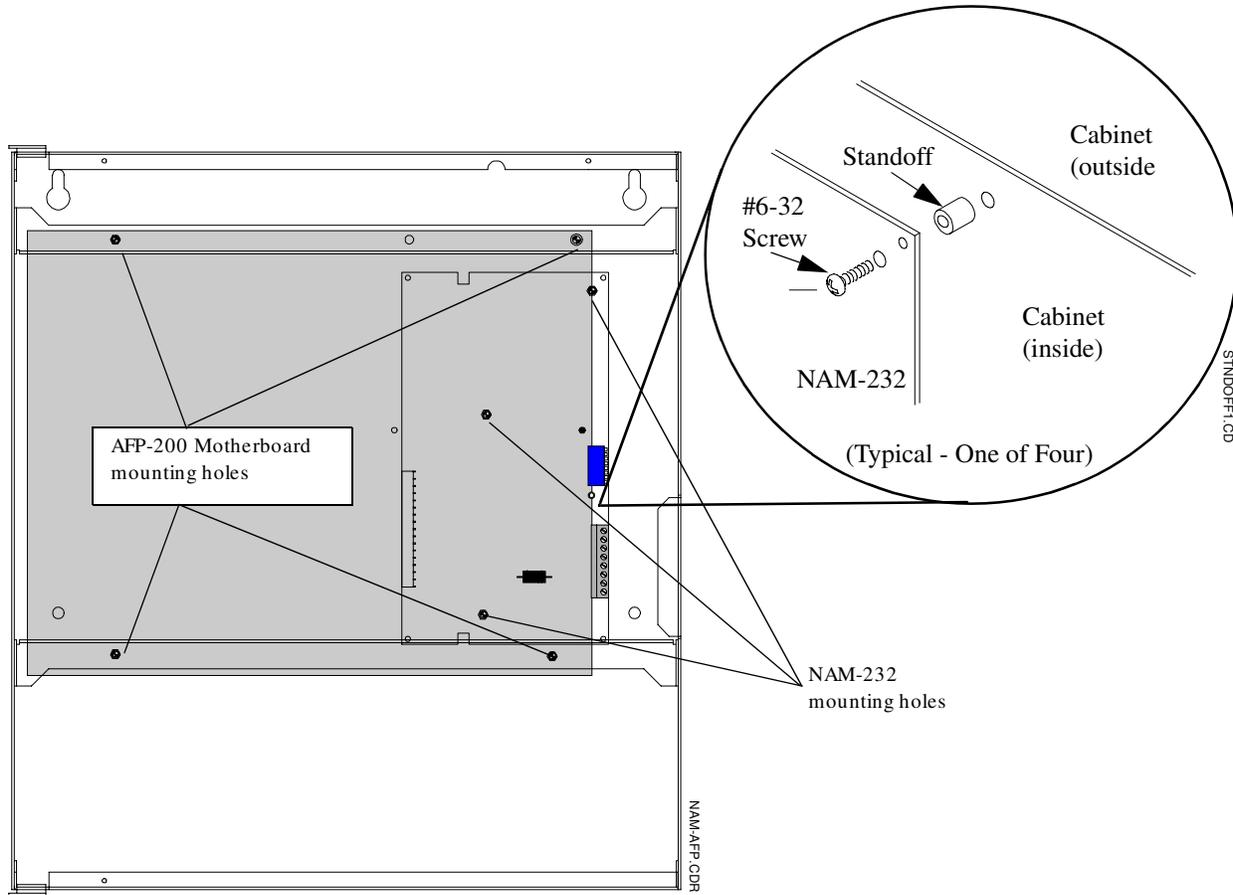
Mounting the NAM-232 Without Removing the AFP-200 Cabinet
